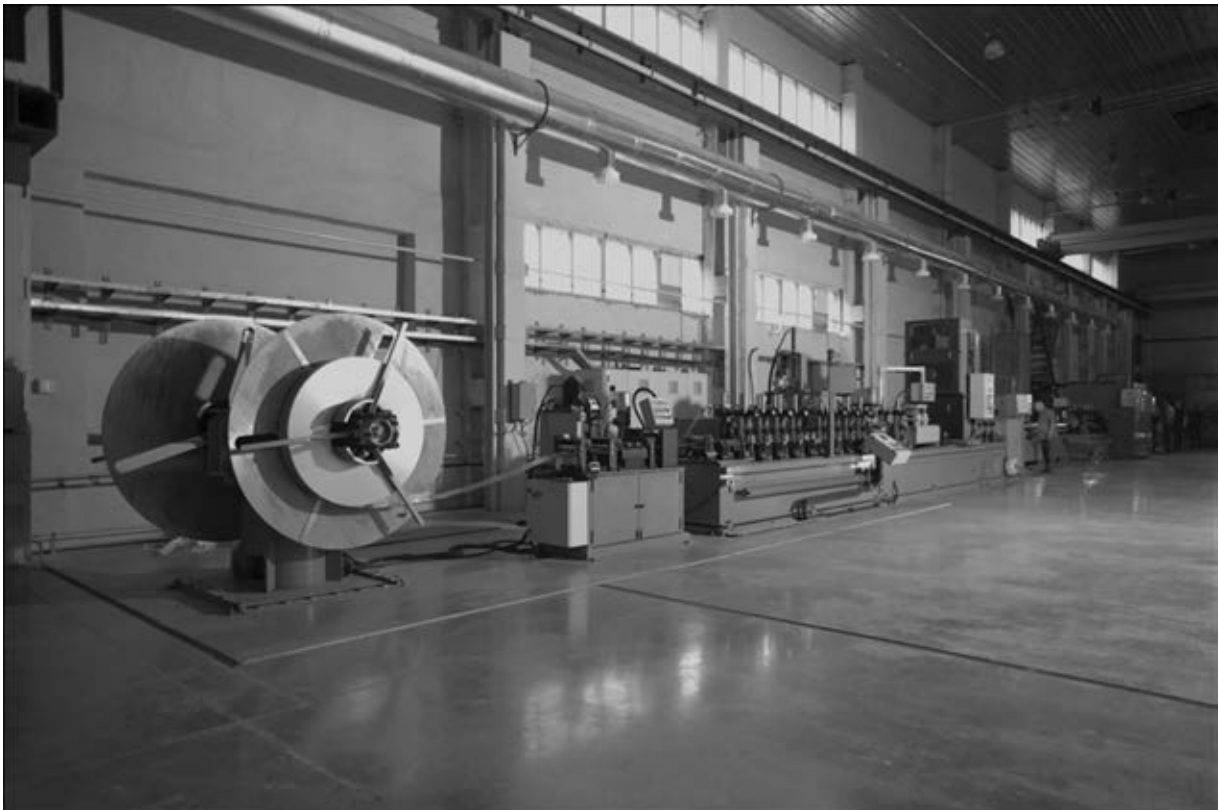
Appearance of electric-weld pipe line (mill 10-60) in the tube manufacturing shop
